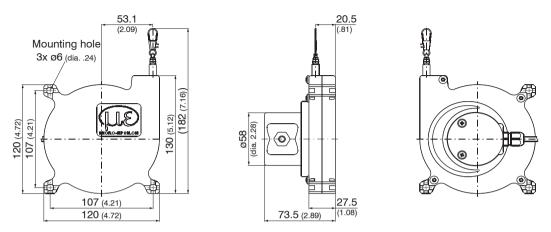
Dimensional drawing WPS-...-MK120-CR, measuring ranges 3000 and 5000 mm, dimensions in mm (inches), not to scale
